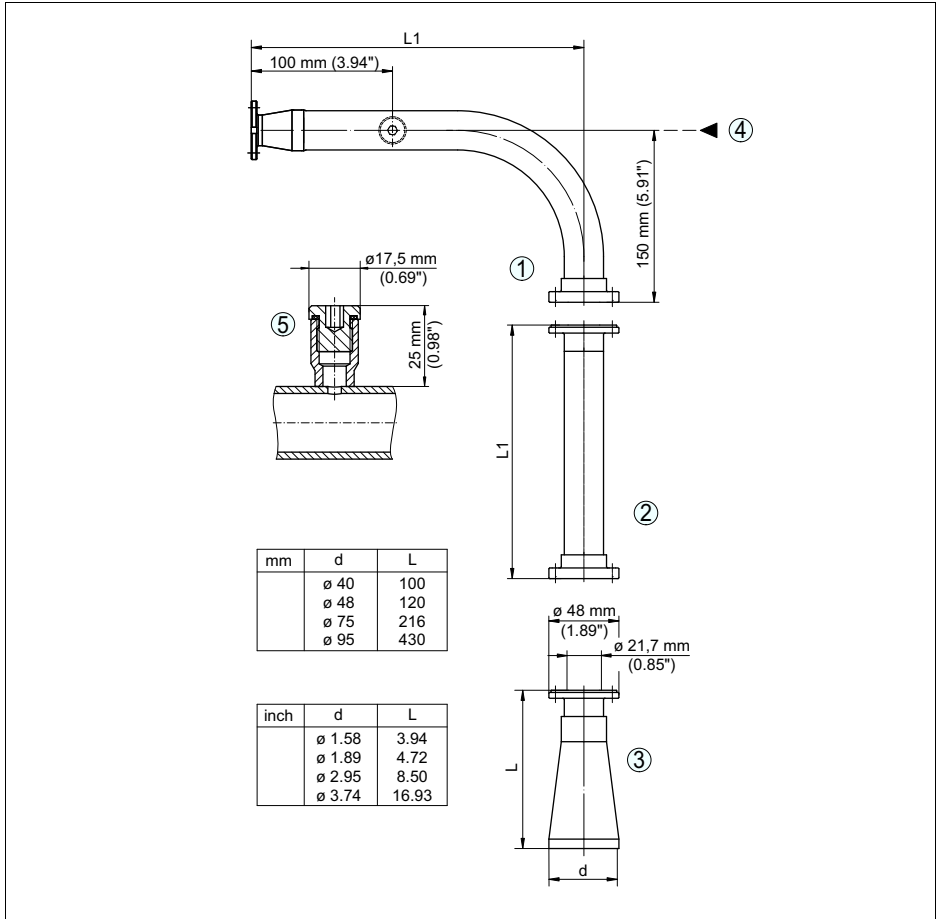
Extension multi-sectional, upper section angled, unassembled horn antenna, dimensions depending on the order specification
